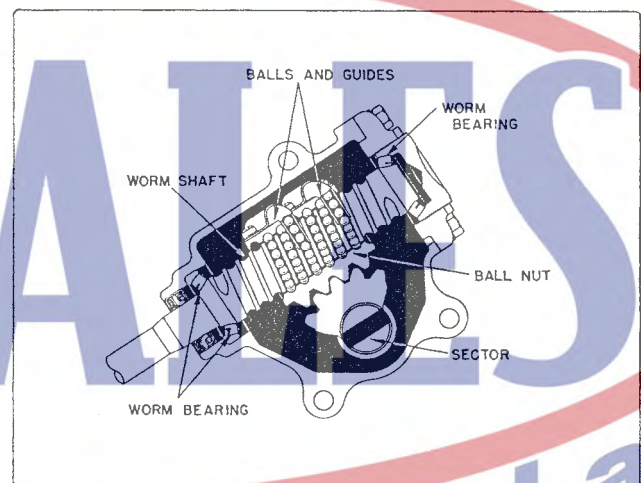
Saginaw Steering Gear Showing Ball Nut
